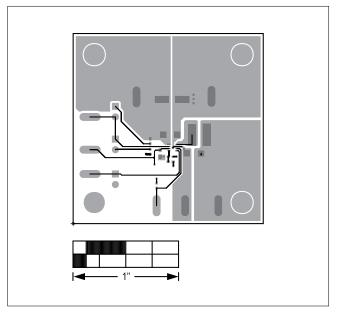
MAX15462C 12V EV Kit PCB Layout—Component Side
